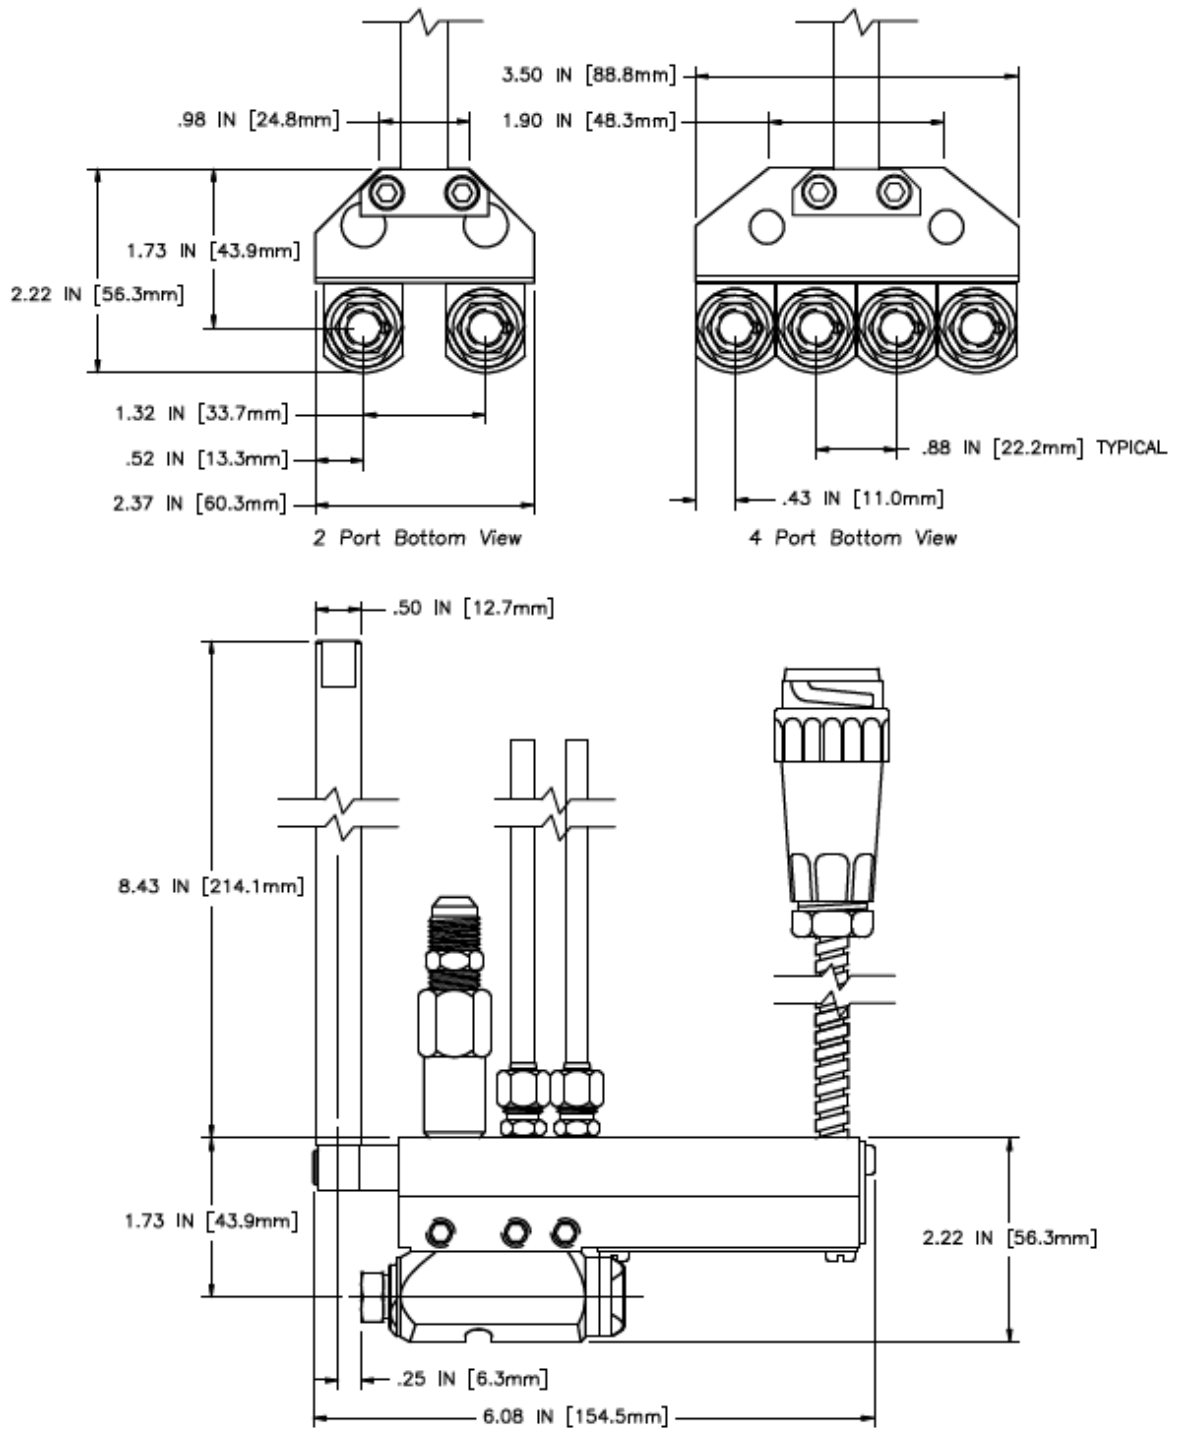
Installation dimensions, Mod-Plus™ Low Profile Head Assembly
